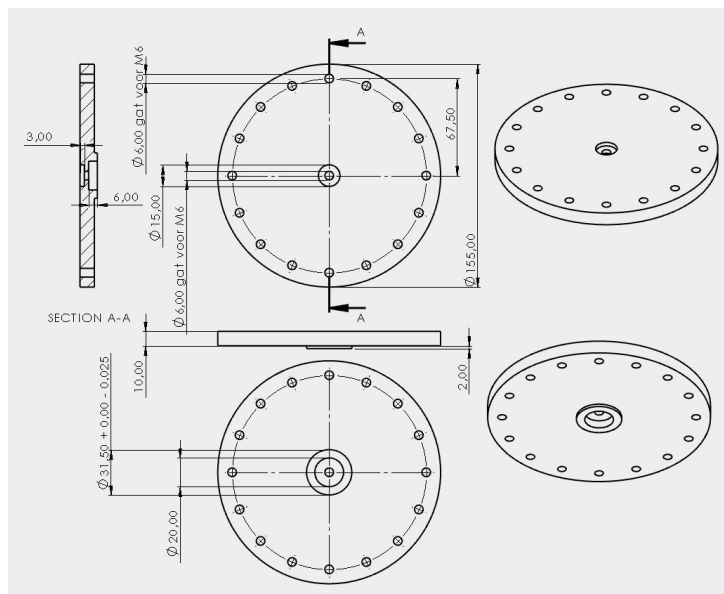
Dimensions of the Robot Flange that connects the Wing-shaft assembly to the robot arm. All units in mm. (Drawing by Dirk De Boer)
